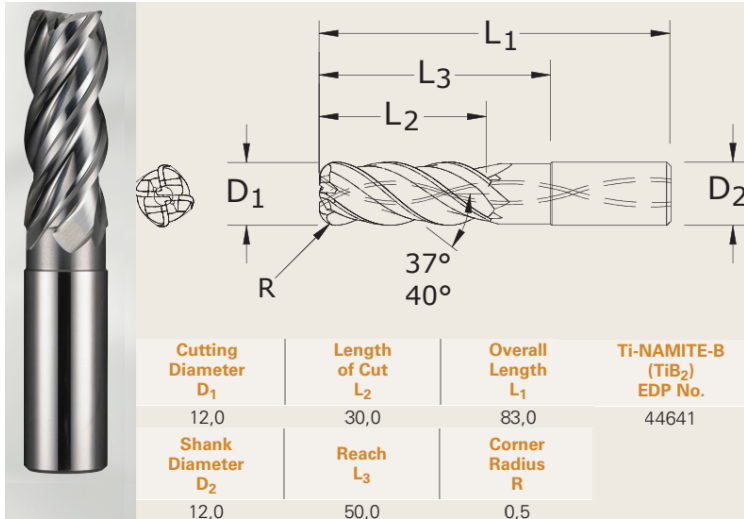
Aluminium milling tool - SGS 43MAPF (#44641) ϕ 12 R0,5 Z4 TL83 - APMX30
